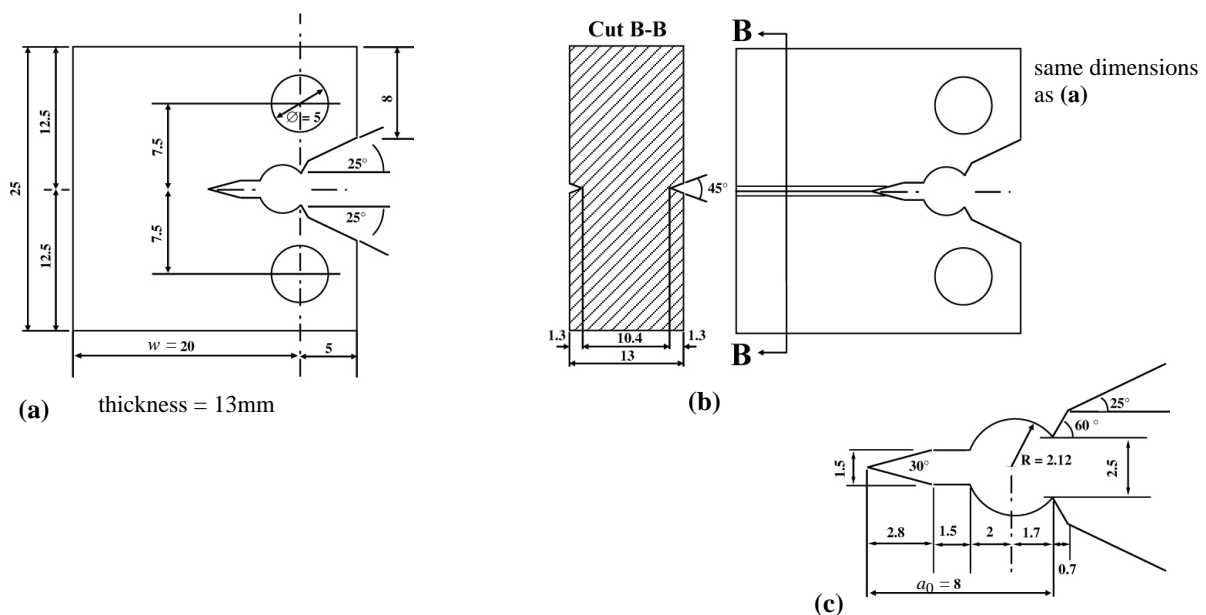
CT specimen geometry for *J*-integral fracture testing. (a): flat specimen; (b): side-grooved specimen; (c): details of the notch geometry. Dimensions in mm.
